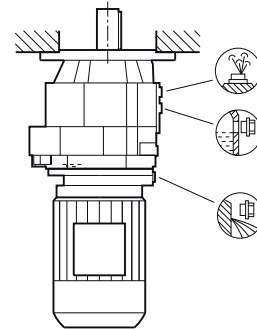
Mounting positions for helical gearbox DF/ZF flange-mounted design and DZ/ZZ with housing flange, size 39
